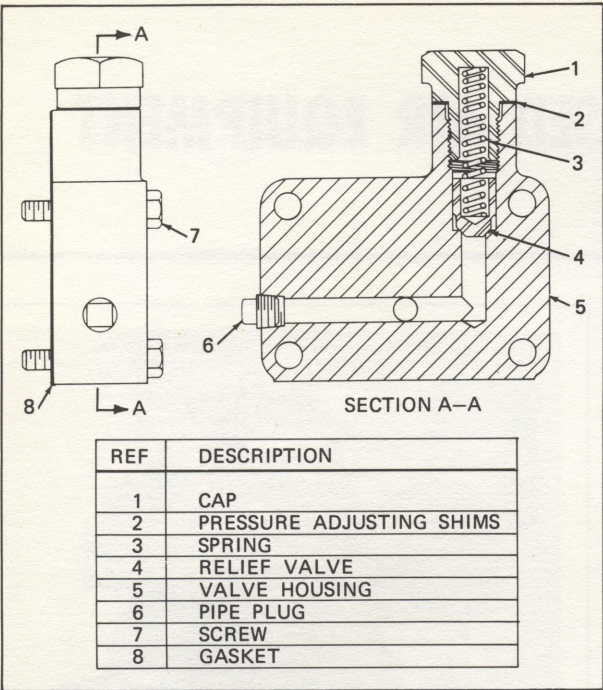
OIL RELIEF VALVE ASSEMBLY.
